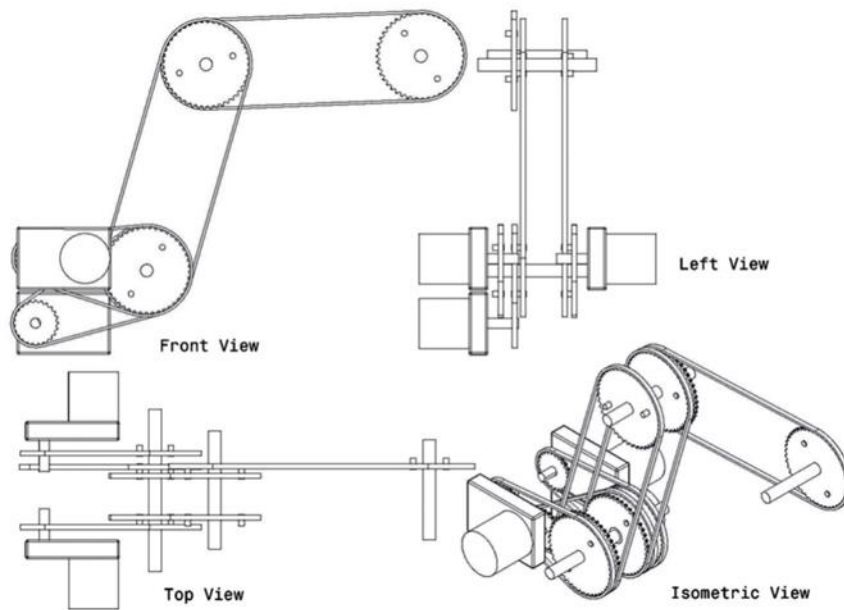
The Drive Mechanism of the Robotic Manipulator
